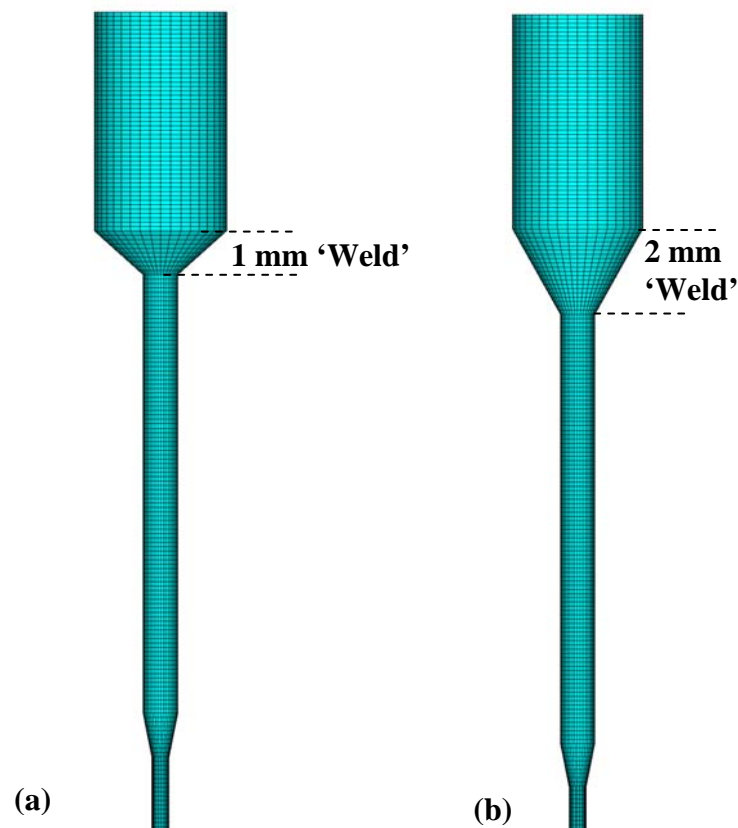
ANSYS[®] model of dumbbell fibre welded to Ear. (a) 1 mm long ‘weld’ (b) 2 mm long ‘weld’.
